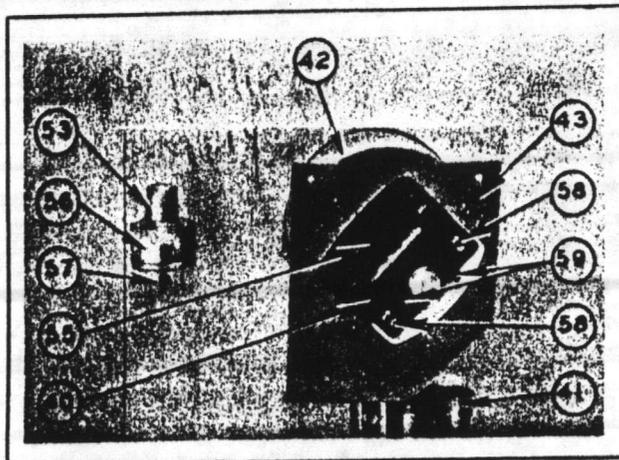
ELECTRIC CHART DRIVE PARTS
